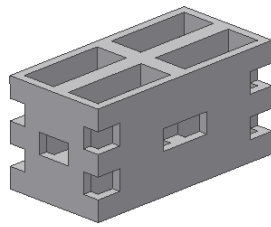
Unit cell with outer dimensions 6 x 3 x 3 mm. Fig. 7 CAD drawing of 16 joined unit cells.
